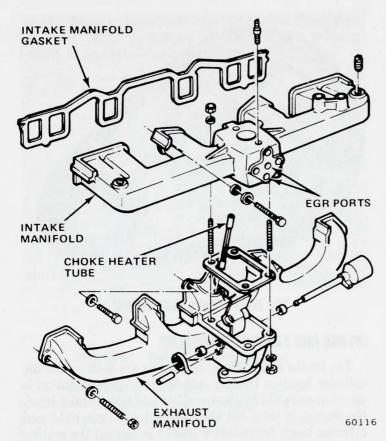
B-90 Intake and Exhaust Manifold Assembly
